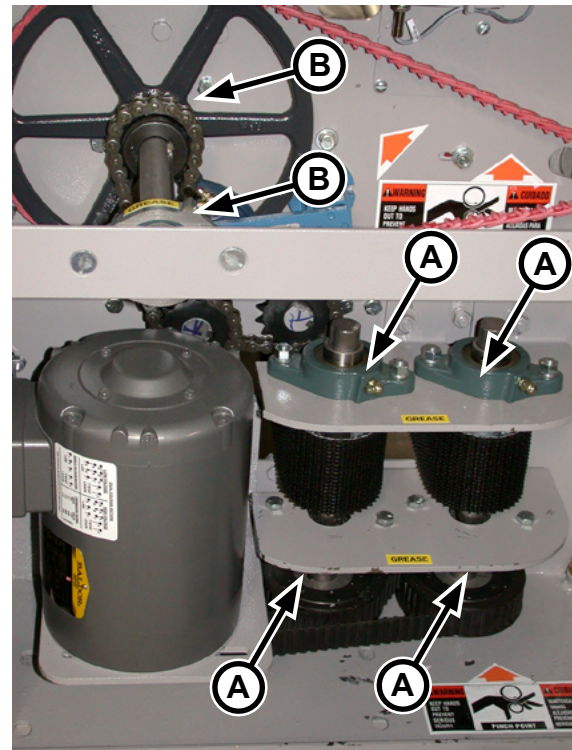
Roll bearings with grease fittings are located in both endframes of the unit.
